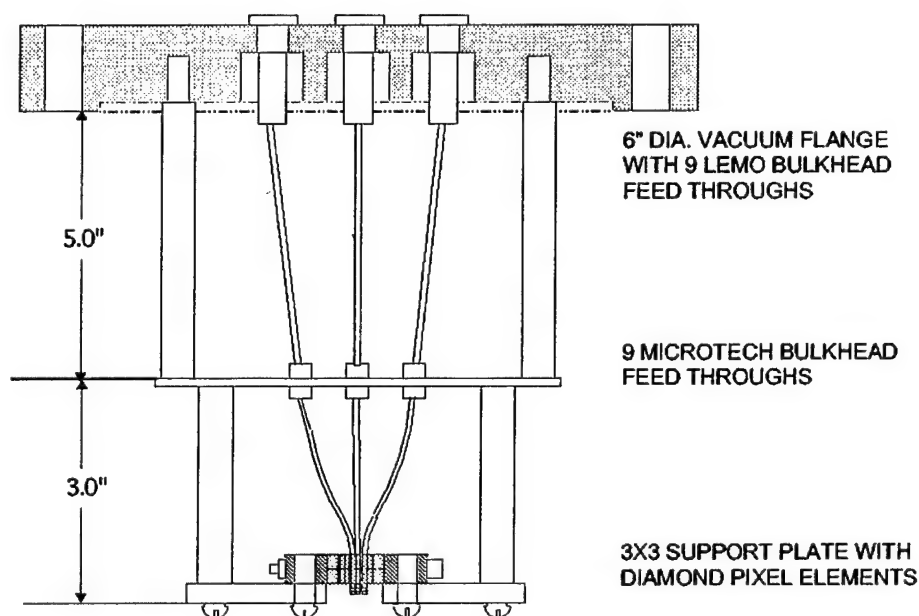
Drawing of the 3x3 prototype diamond camera.
